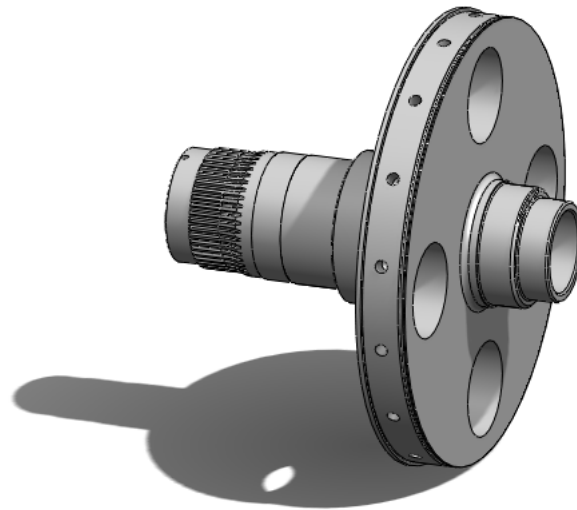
Liquid end hub – machined to a smaller diameter with radial holes and an o-ring groove
